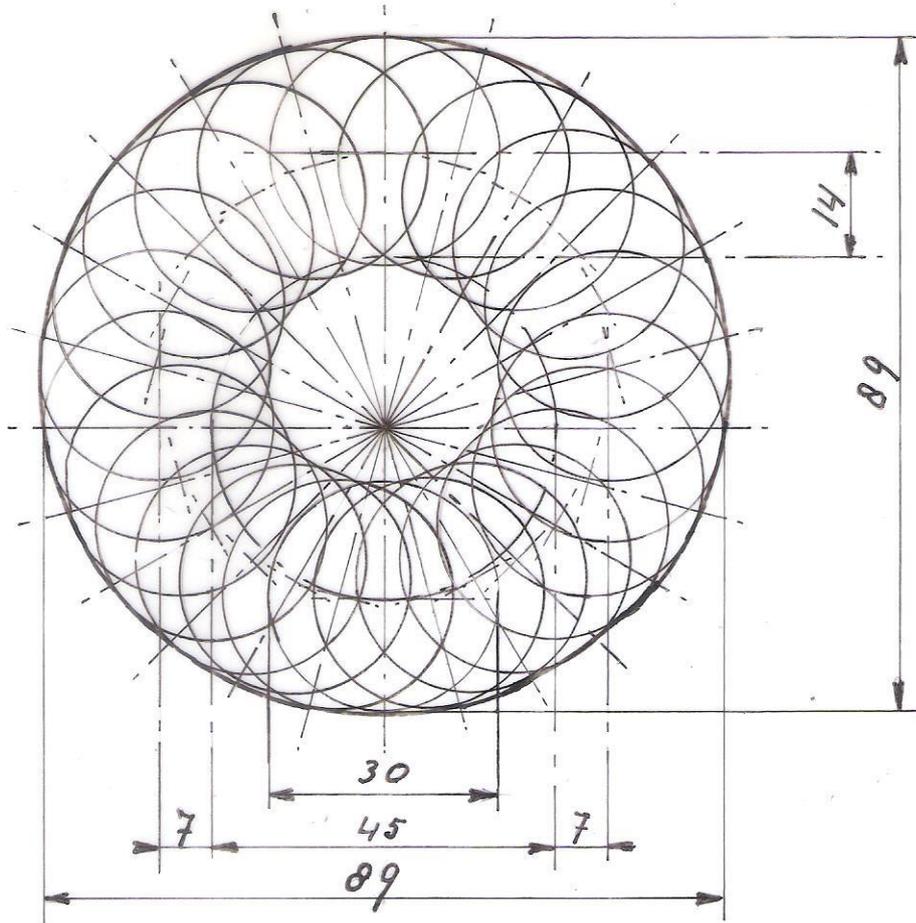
Positions of the cutter of a programmable milling machine for ϕ increasing by 15°
